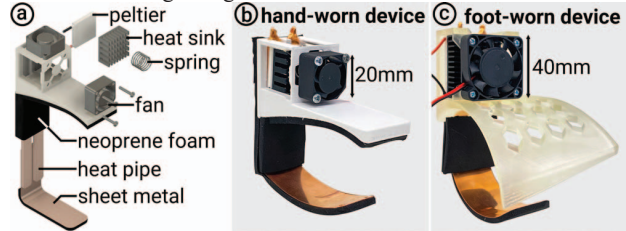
(a) Exploded view and fabricated devices for the (b) hands and (c) feet.
